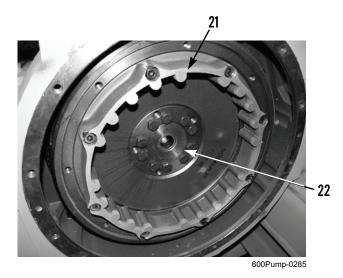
Outer Ring of Coupling and Pilot Bushing Assembly at Engine Flywheel Bore.
